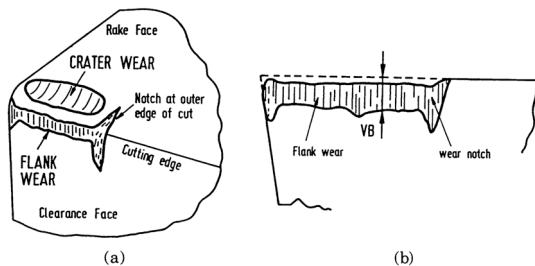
(a) Regions of tool wear on a cutting tool; (b) measurement of flank wear [1]
